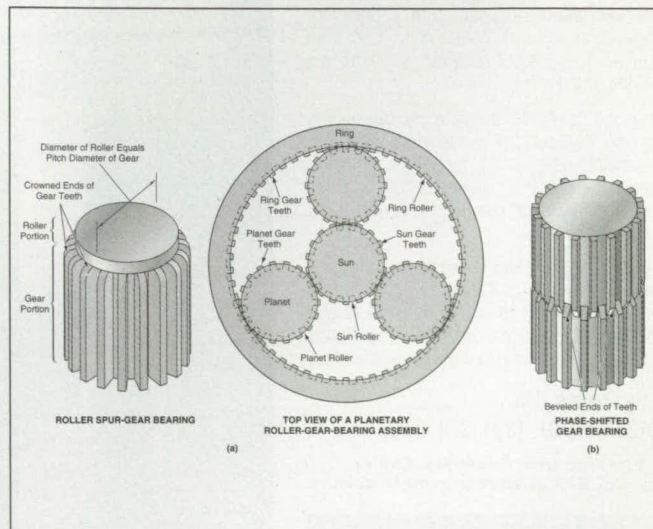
Gear-Bearing Configurations: (a) roller spur-gear bearings would offer advantages, relative to simple spur gears and bearings, for the operation of planetary gear assemblies. (b) A phase-shifted gear bearing could mesh with an identical twin and would offer advantages similar to that of the roller spur-gear bearing depicted in (a).
